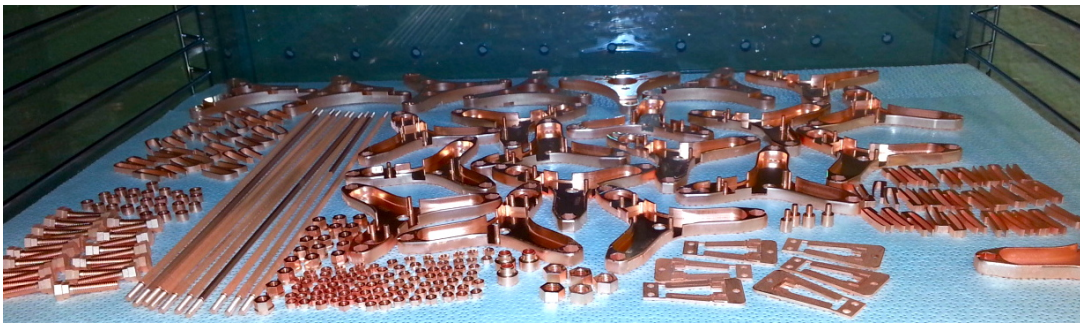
UGEFCu machined parts, ready for installation in Module 2.
